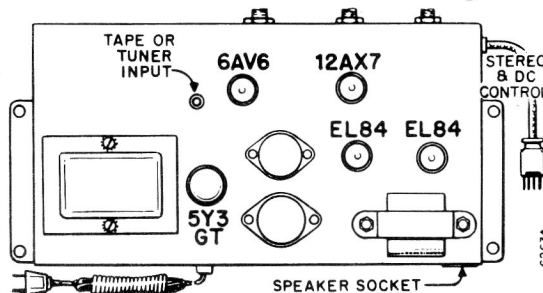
Top View of 5T4A Chassis, Tube Locations Shown.
